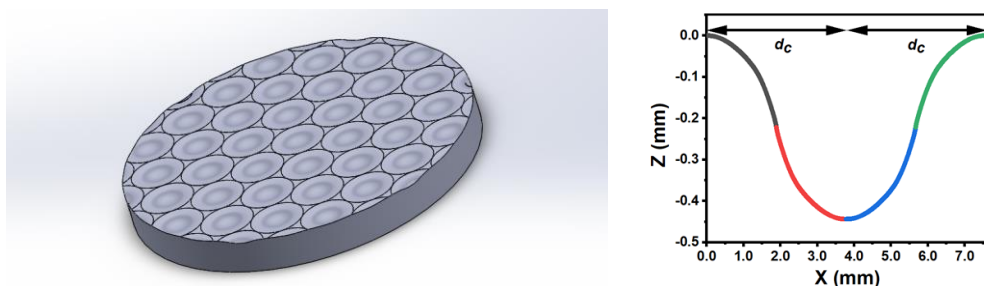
Left: Surface of a sample 50 mm in diameter with bell shape cavities arranged in hexagonal configuration – Right: Cross section view of a bell-shape "cavity" [9].
